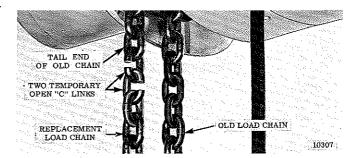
Installing Coil Load Chain Using Two "C" Links (1/4, 1/2, 1 ton hoists)
